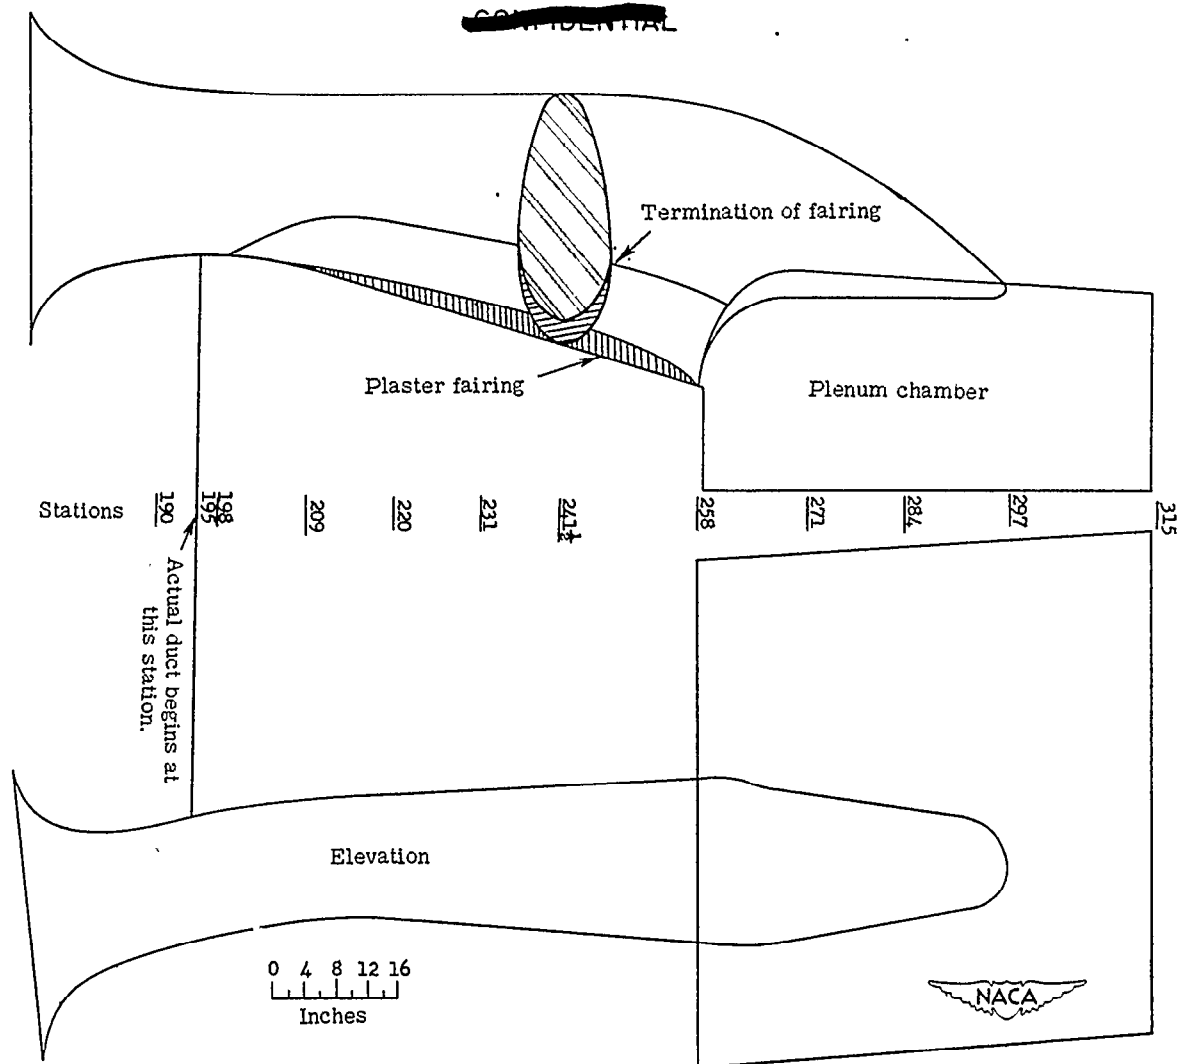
Plan and elevation view of XF9F-2 engine-air inlet duct as refaired along inboard wall.
